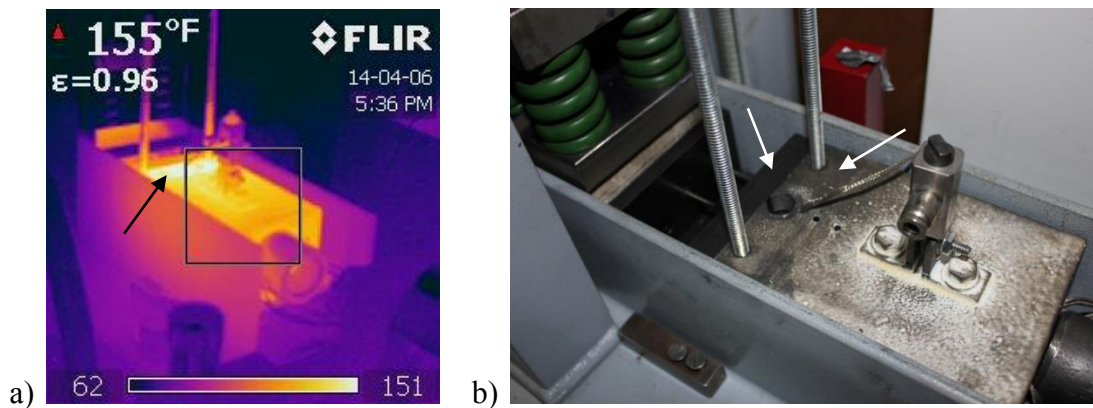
Infrared thermal image of rear view of die insert holding block and face plates during 4043 aluminum rod processing
